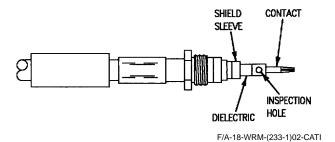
4806-0903 and 4806-0905 Triaxial Connector Repair (Sheet 2)
